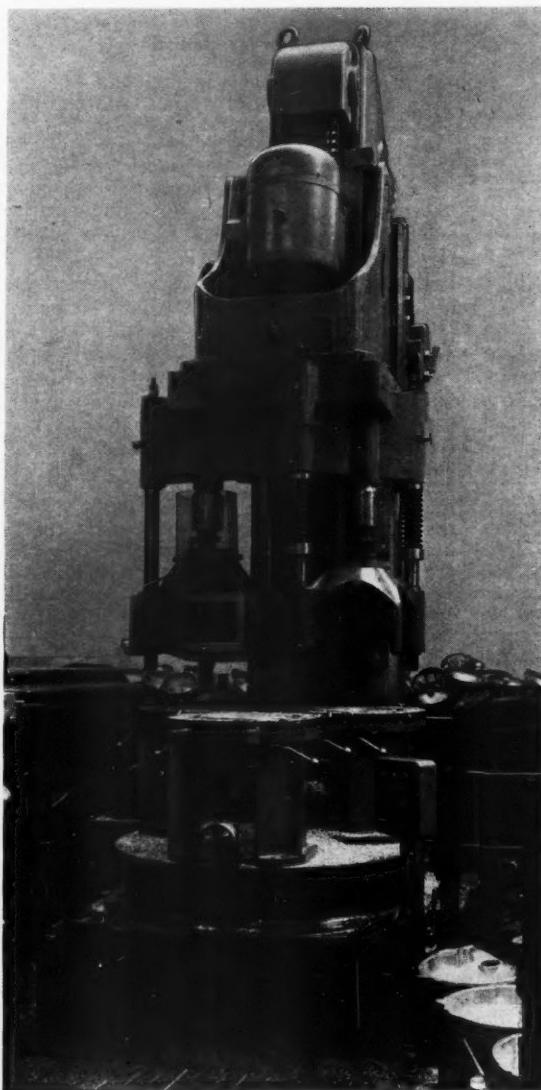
Three-station, two-spindle Footburn machine for the first operations on the gearbox casing
